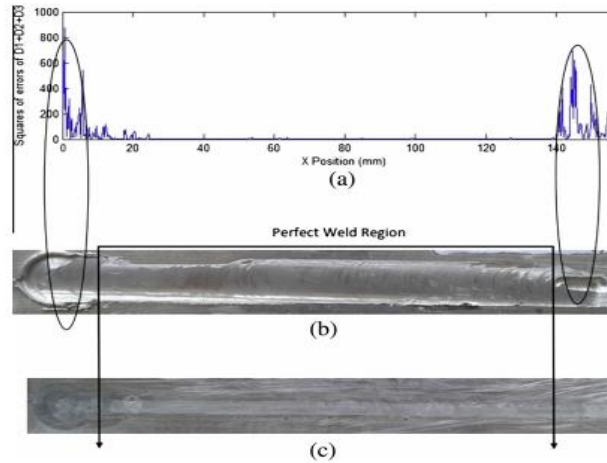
(a) Square of errors of sum of detail coefficients, (b) front side of the weld, and (c) rear side of the weld [10]
